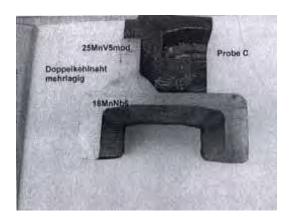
Profile of 25 MnV5mod and 18MnNb6 multiple-layering double-fillet weld
